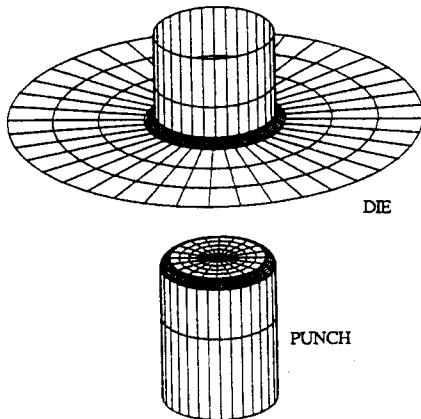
Schematic view of tool surfaces for cylindrical cup deep drawing
